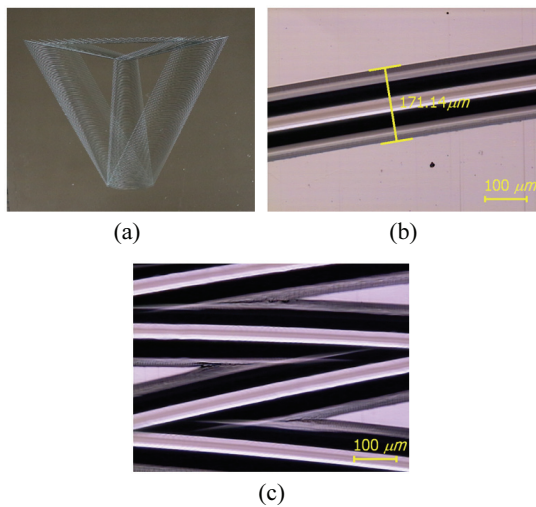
Shape of (a) the machined tetrahedron consisting of mane arcs, (b) a single machined arc and (c) crossed machined arcs
